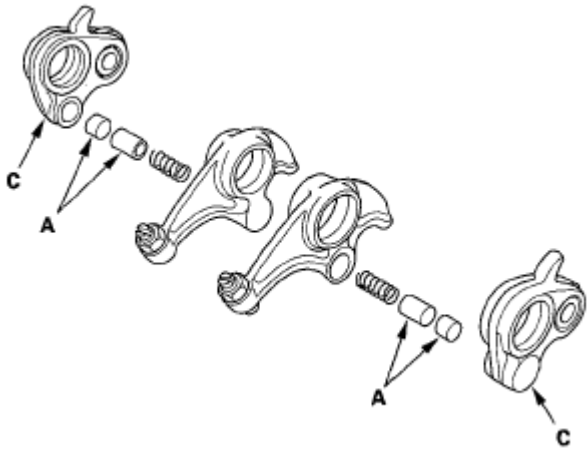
Identifying Rocker Arm Pistons - Exhaust
